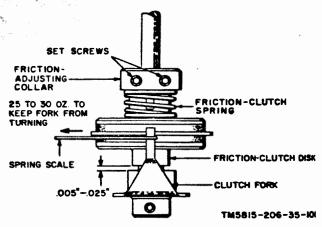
Transmitter friction-clutch adjustment (TT-4A/TG).
